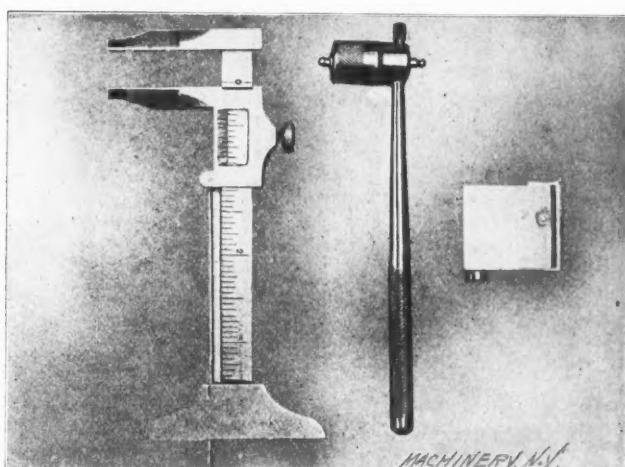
Vernier Caliper Depth Gage, Inside Micrometer, and Scribing Block.
